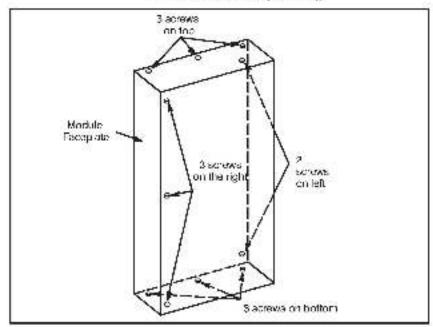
Disassembling the Module to Replace the 32mA Fuse.
